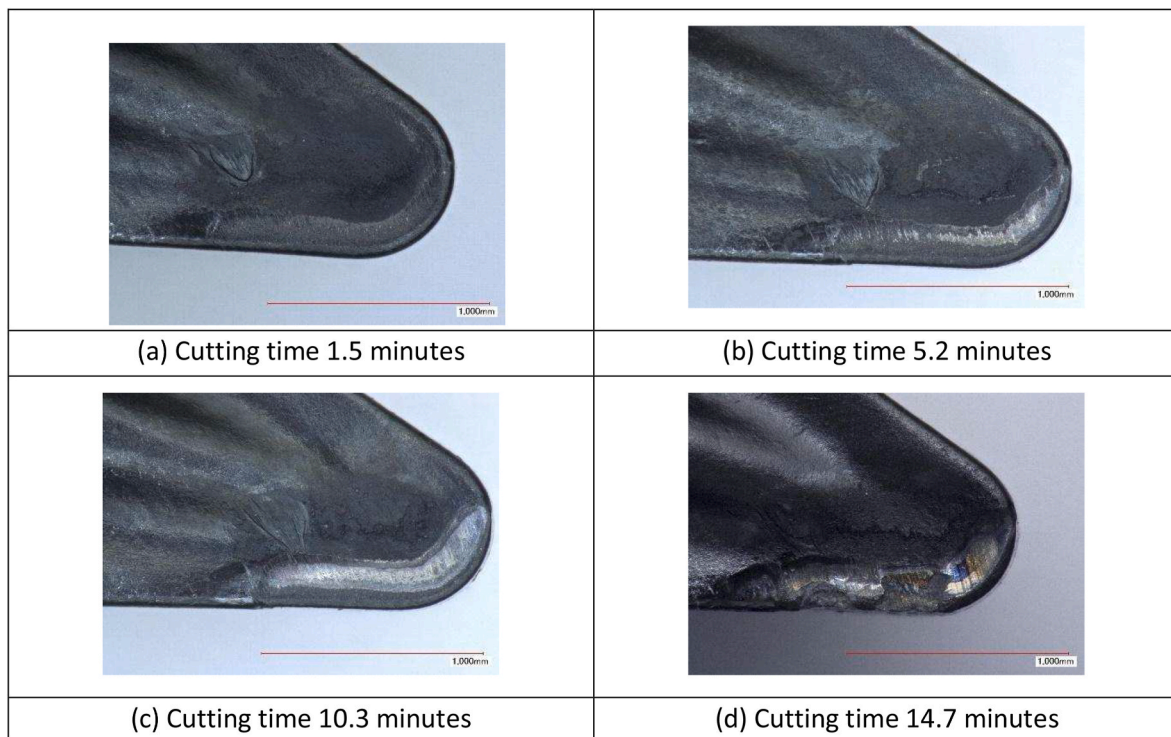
Tool wear evolution on the tool rake face ($v_c = 400 \text{ m/min}$, first repetition) (a) 1.5 min; (b) 5.2 min; (c) 10.3 min; (d) 14.7 min.
